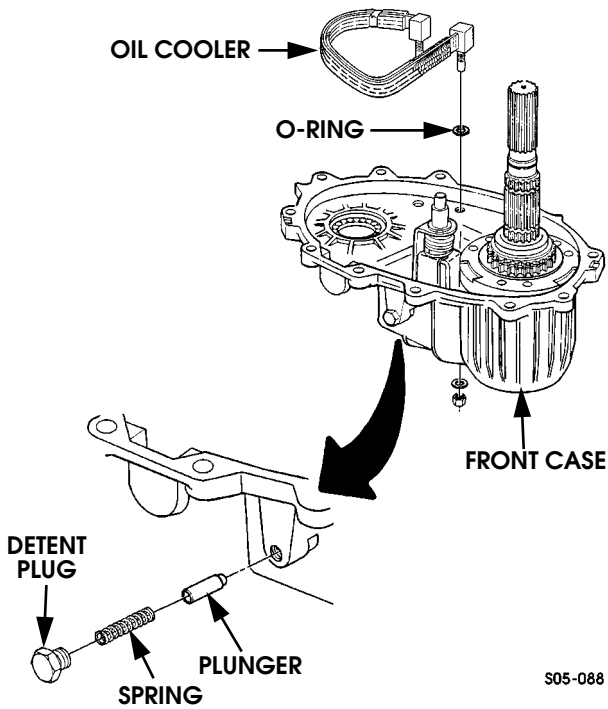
Oil Cooler and Detent Plug, Spring, Plunger Removal
